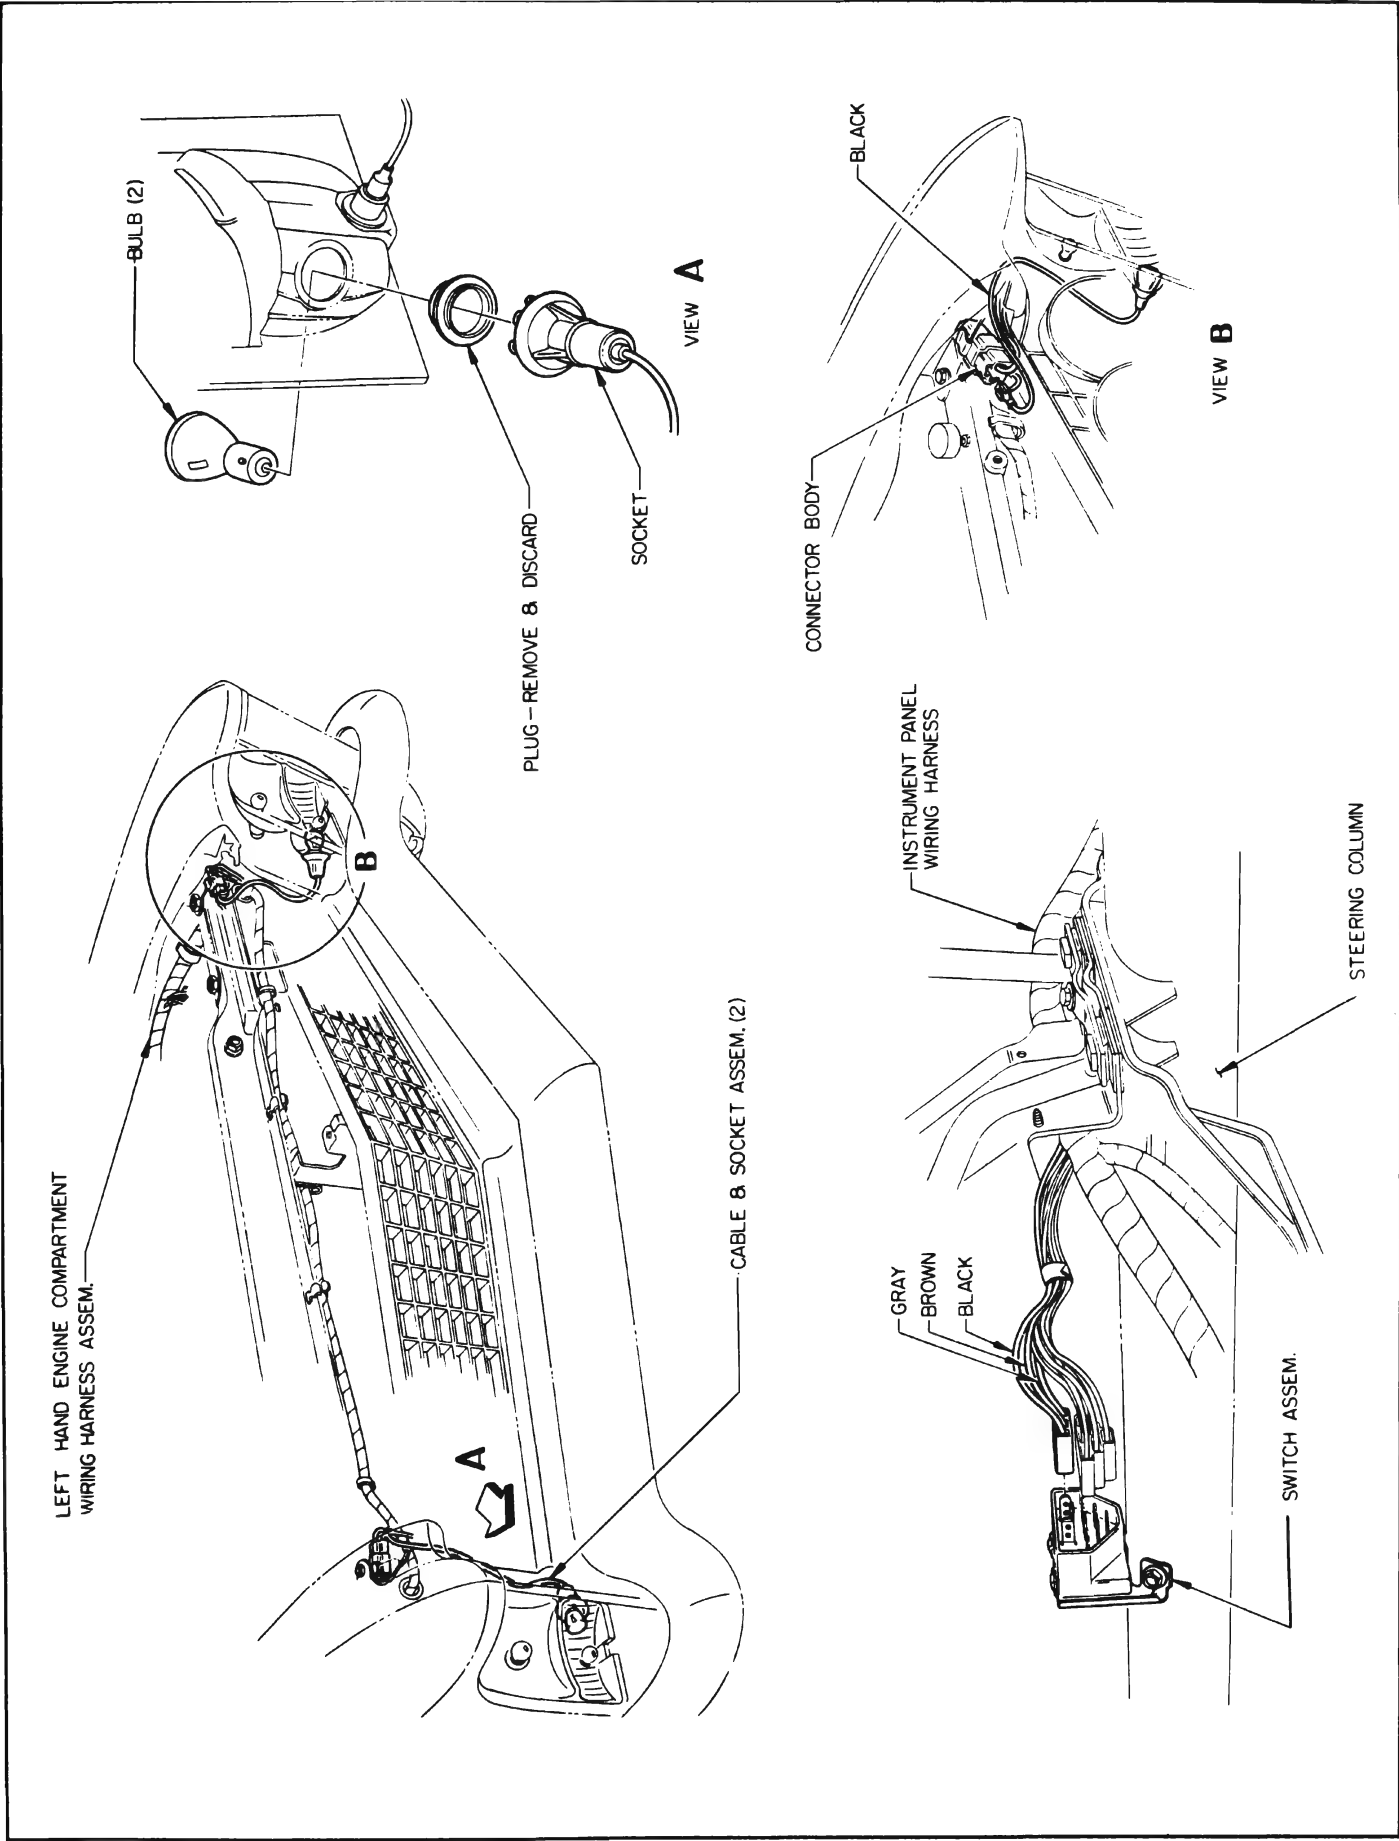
Cornering Lamp Wiring Installation—Riviera
